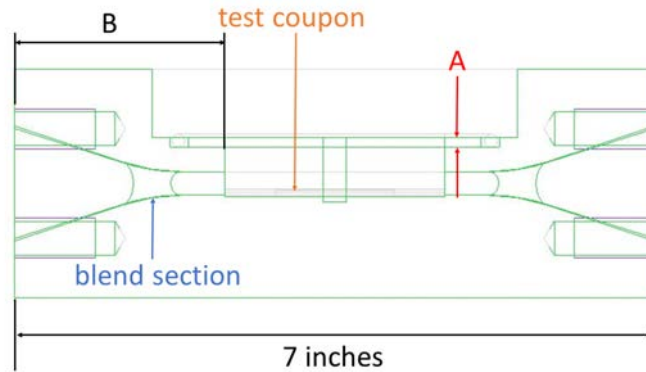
Side view of the preliminary test cell design showing the entrance and blended section (B), the o-ring land (A) and the location of the test coupon.
